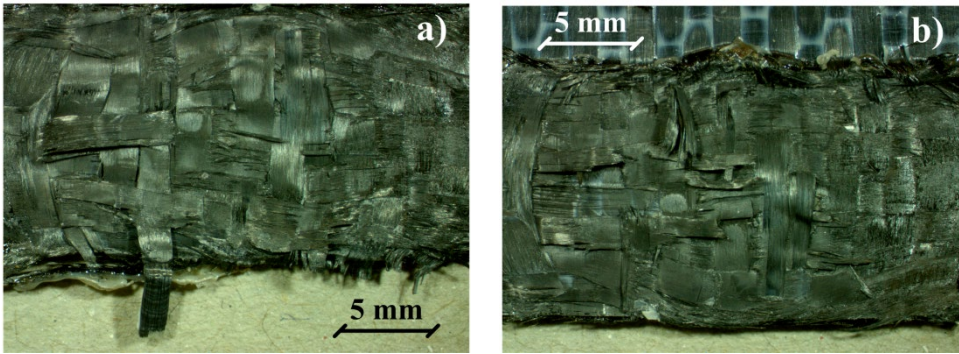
Fracture surfaces of the a) bottom and b) top adherends of specimen B03-02 (batch 3).
